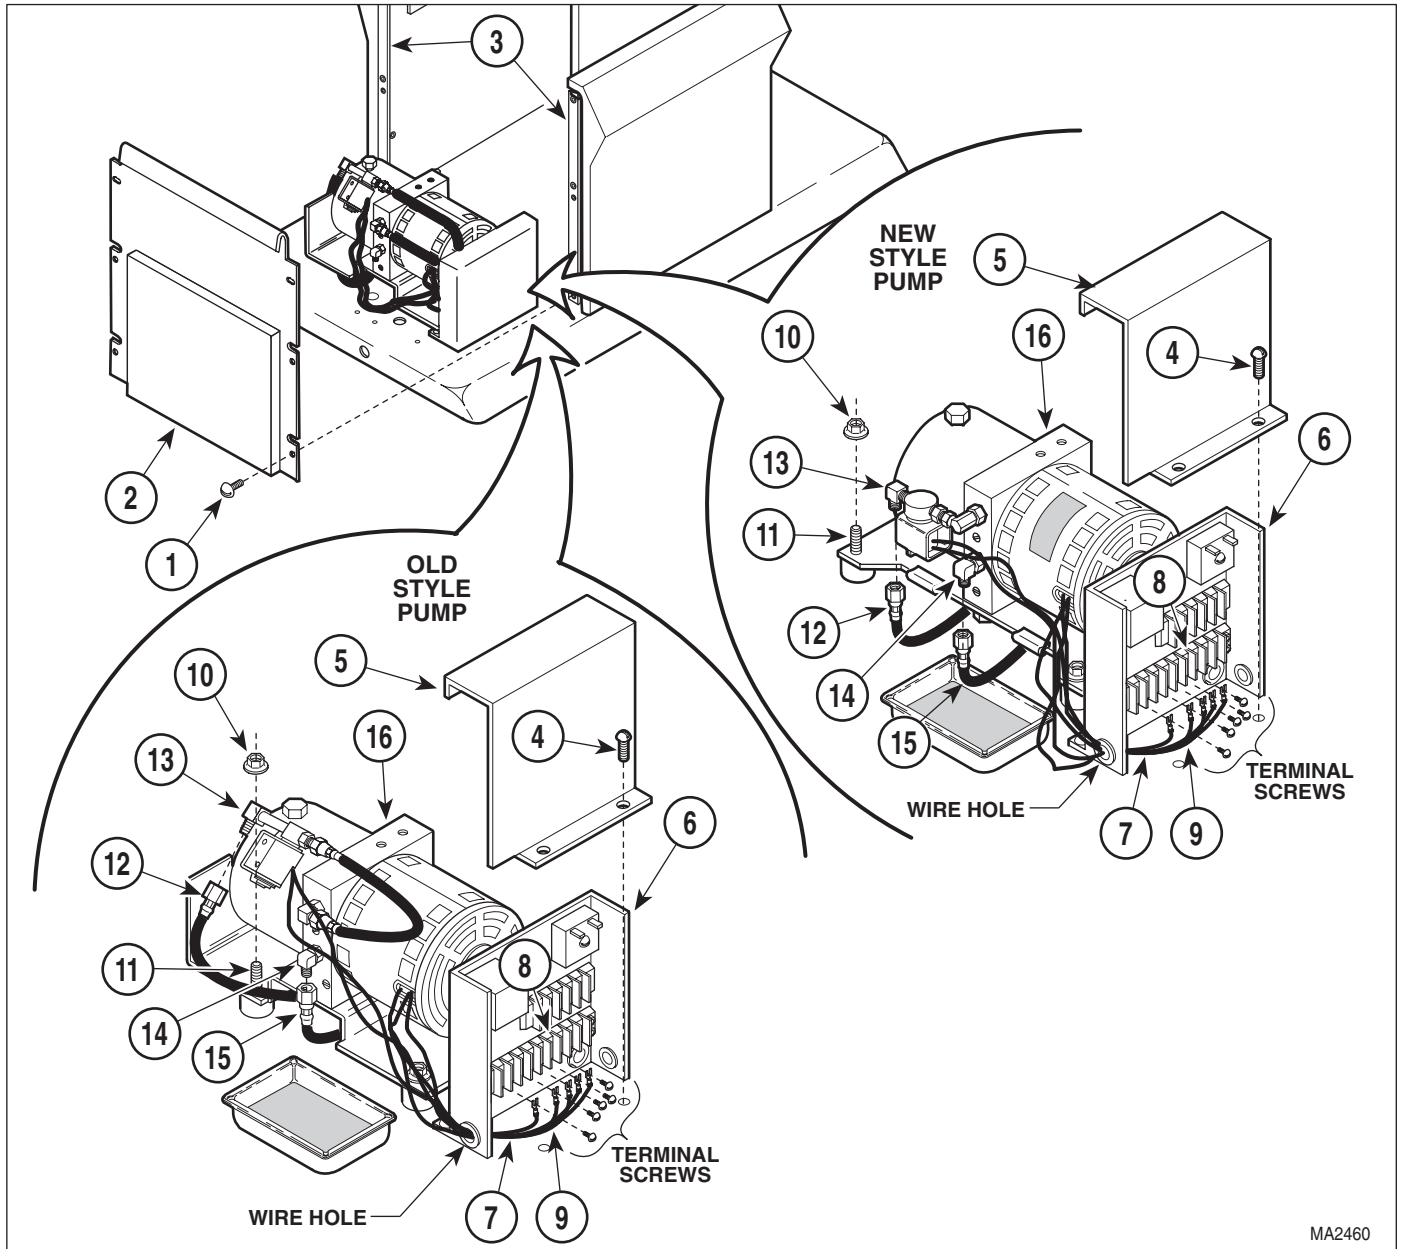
Motor Pump Assembly - Complete Removal / Installation
